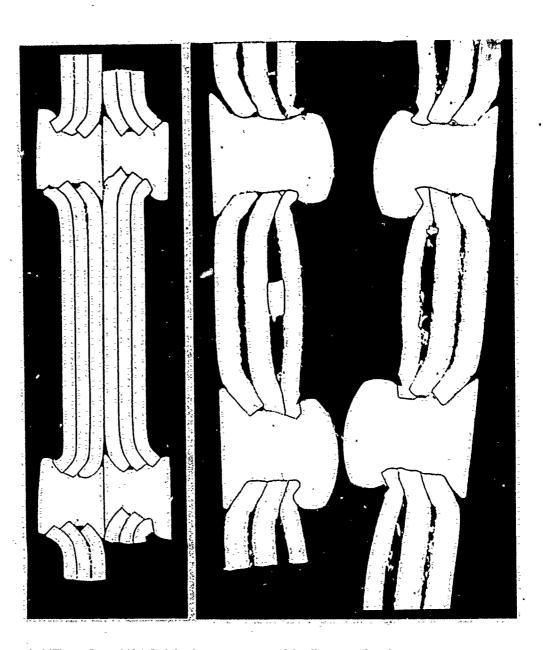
& 12 CROSS SECTIONS OF RIVETTED JOINTS.
